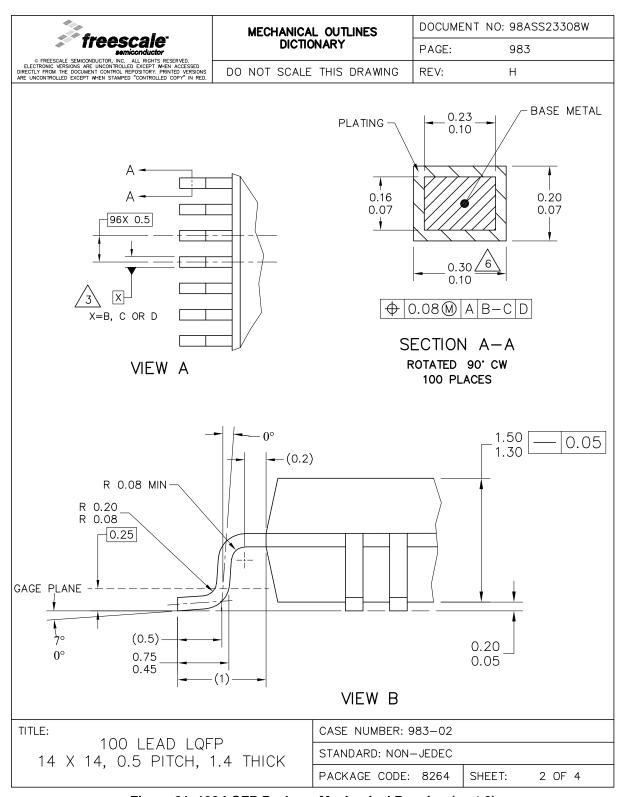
100 LQFP Package Mechanical Drawing (part 2)
